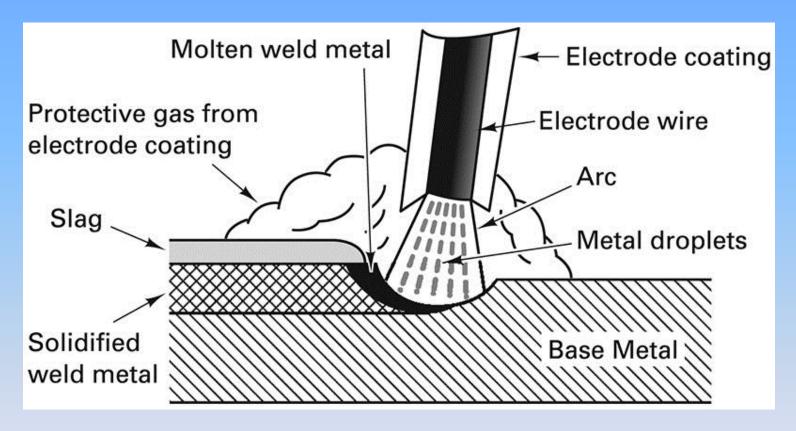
Schematic diagram of shielded metal arc welding (SMAW). (Courtesy of American Iron and Steel Institute, Washington, DC.)
